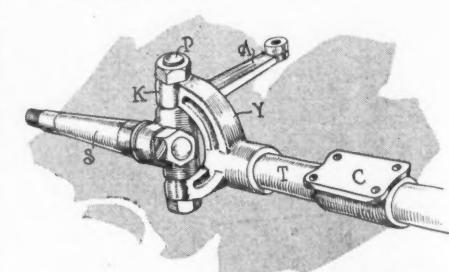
STEERING ARRANGEMENT WITH WHEEL SPINDLE SEPARATE
